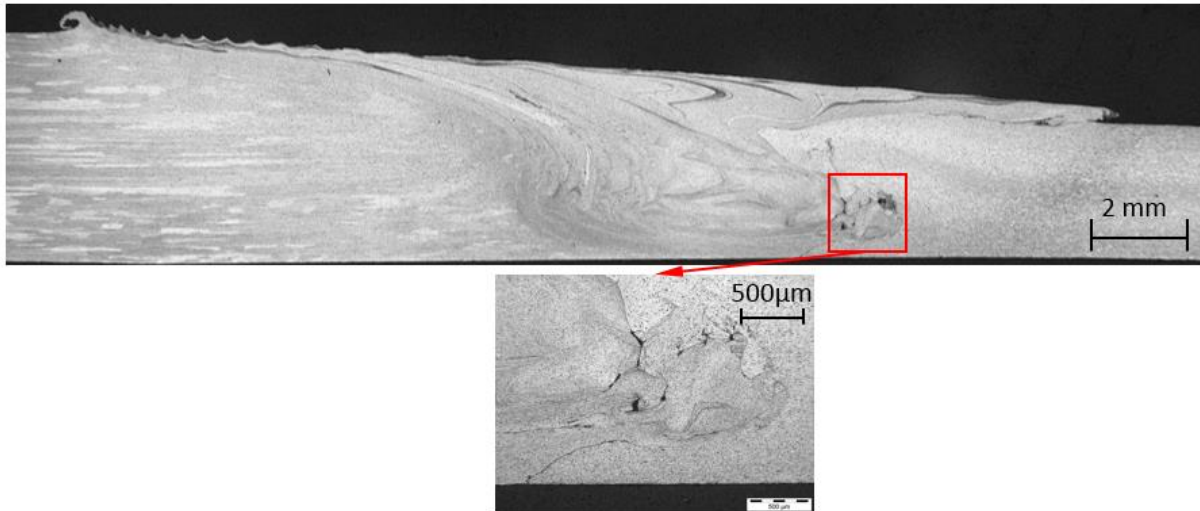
Cross section macrograph of the weld bead produced during the inverted setup study (Courtesy of TWI,Ltd).
